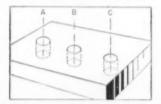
In grinding three holes to size, A and B are roughed to within 001"—002", and C within about 005". Using a freshly charged mandrel, C is finished to size, thereby breaking down the high points on the tool. A and B may now be safely ground Bo piza.
